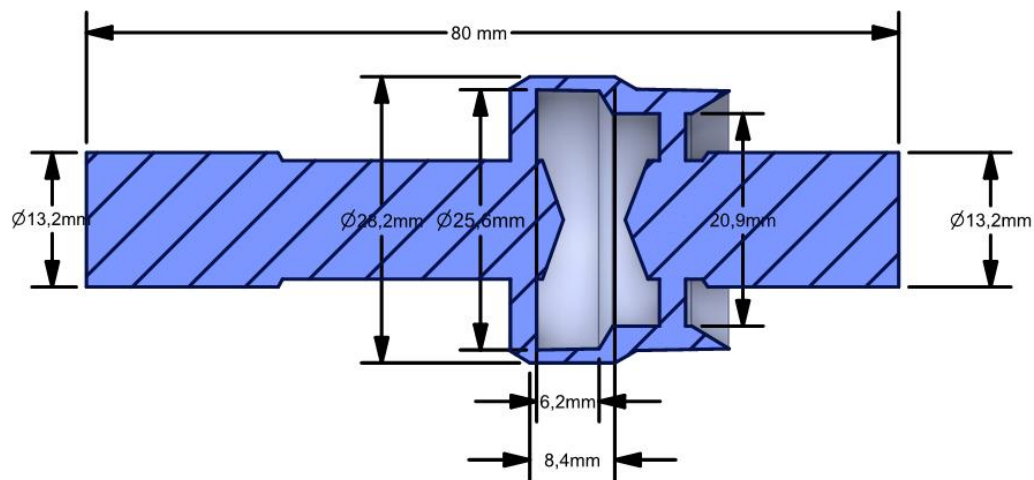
Basic dimensions of the original valve fluid domain geometry.
